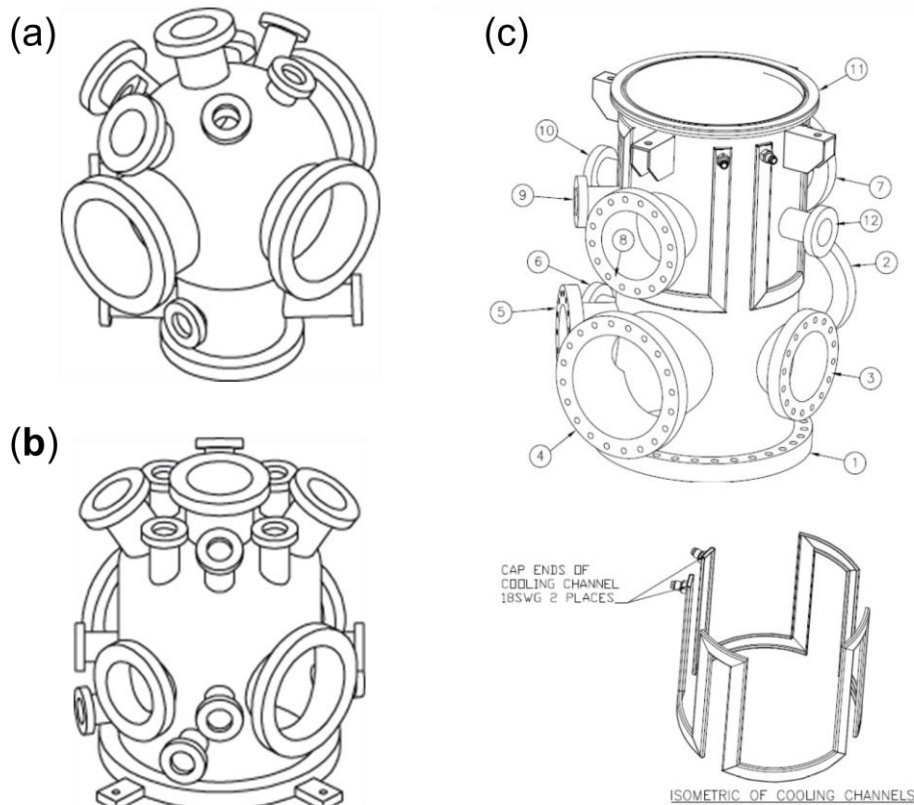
Multipurpose UHV testing and measurement chamber design study examples: (a) spherical, (b) cylindrical with open flanged end and closed dished end, (c) cylindrical with open flanged ends and cooling channels.
